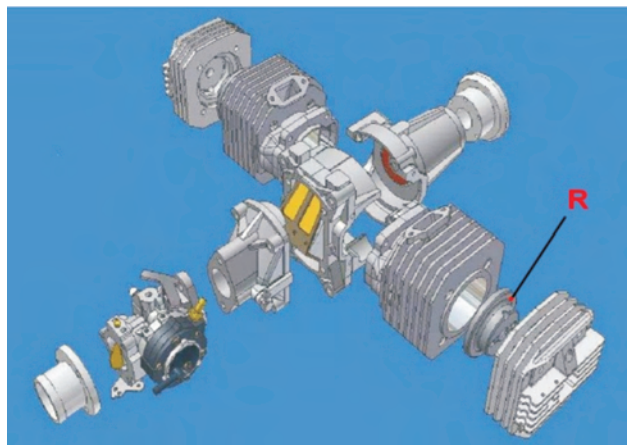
SCS 3W240 HFE Assembly; R – combustion chamber ring insert [8]
